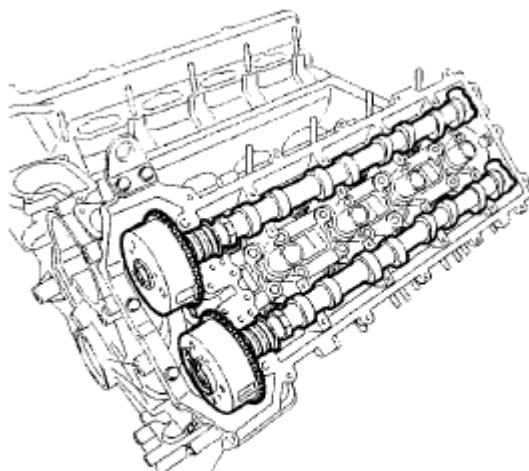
Identifying Camshaft Bearing Caps And Camshaft Thrust Bearing Cap Bolts
